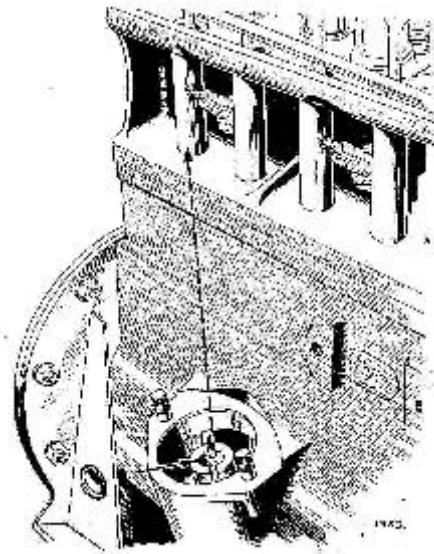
For a 4-cylinder engine, the driving slot is aligned with the push rod tube when number 1 piston is at top dead centre compressions stroke. Note the offset shown by the arrow.
